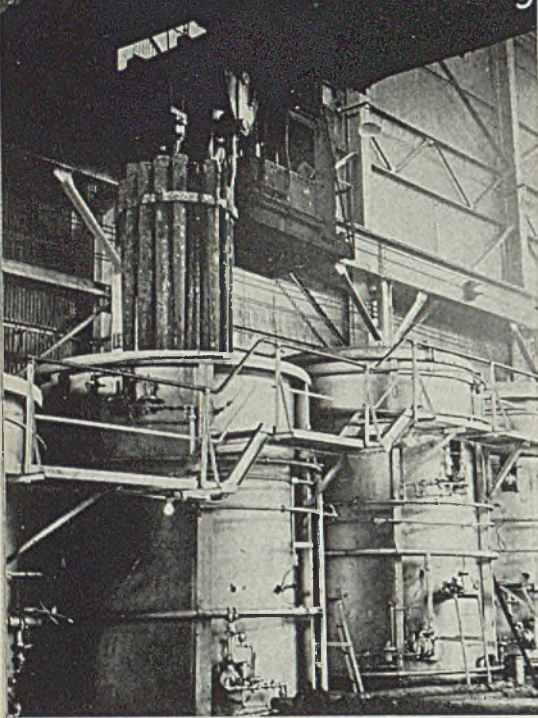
This batch of 37-millimeter gun forgings is being removed from one of the vertical gas-fired heat-treating furnaces
